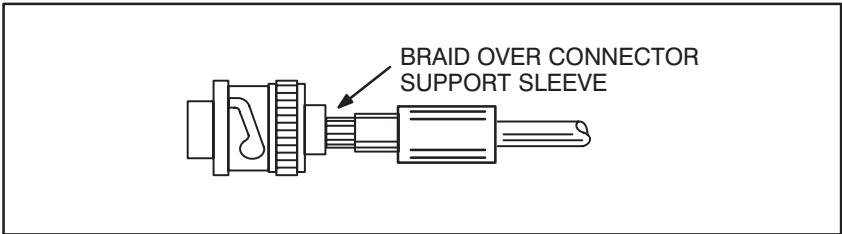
Connector Installation Step 10 for RG-11/U Cable
